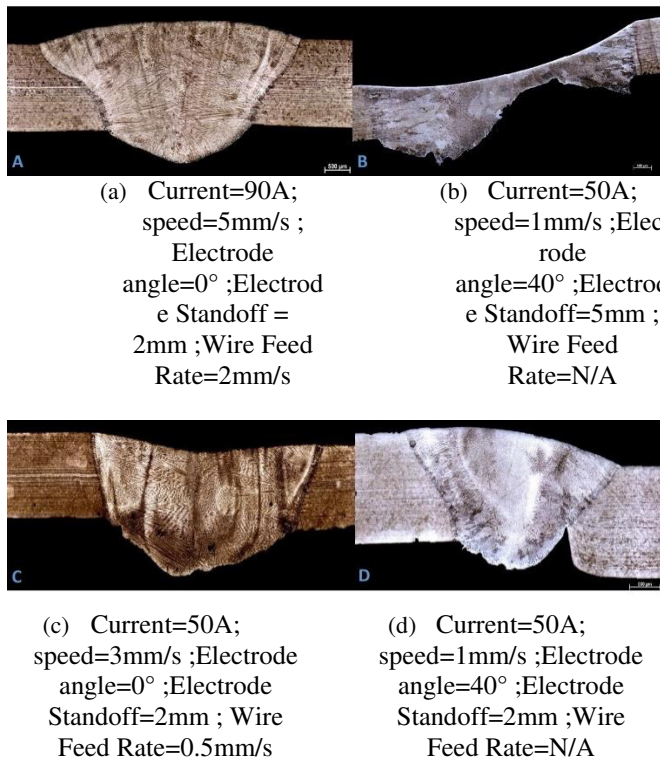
Cross-sectional view of the TIG welded samples
